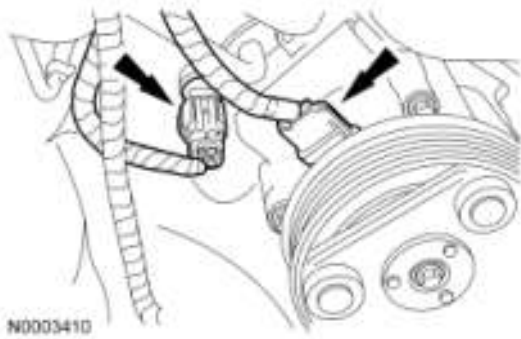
Locating A/C Compressor And A/C High Pressure Cut-Off Switch Electrical Connectors
